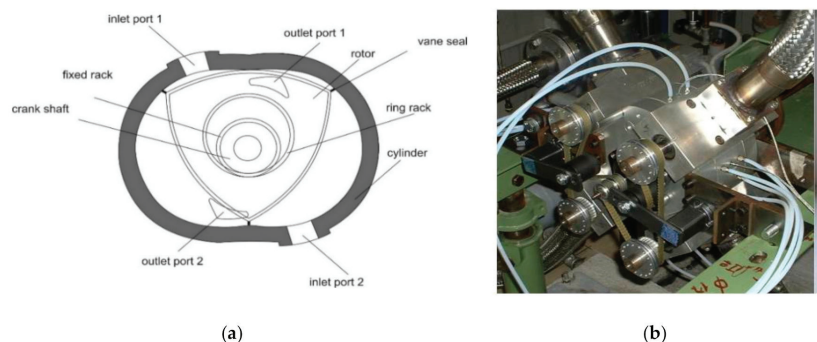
Design and assembly details of a Wankel expander: (a) cross section of Wankel expander; (b) a general view on Wankel expander [192].
